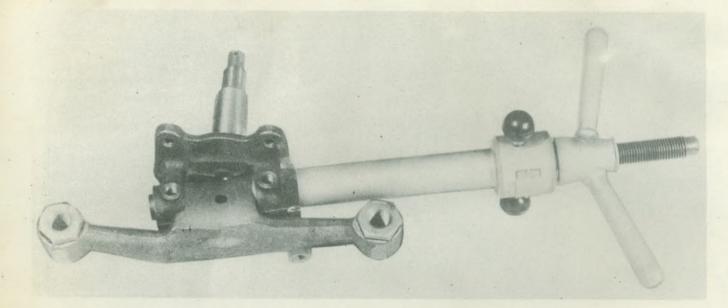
Extracting front swivel pin with approved extractor—Tool No. 20S.97.
